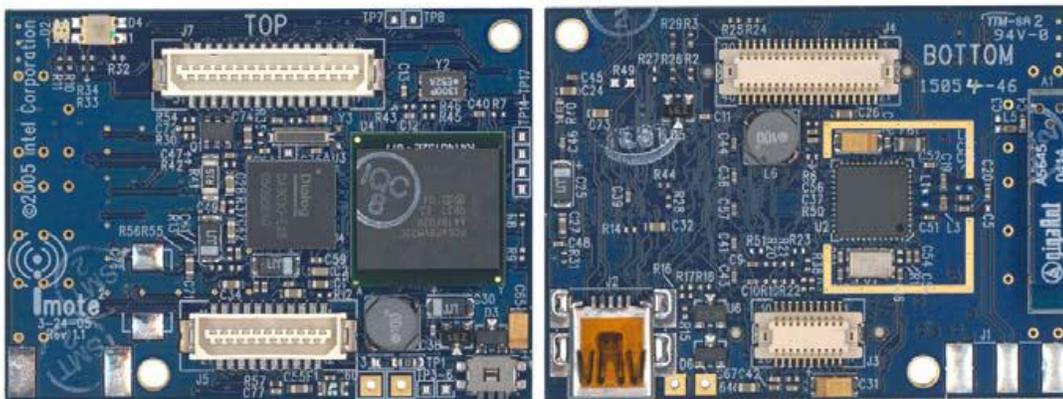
Top and Bottom View of IPR 2400 Processor Board
